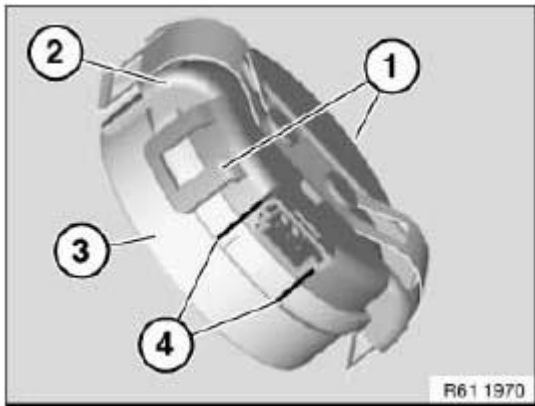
Identifying Solar Rain/Light Sensor, Optical Element And Catches
